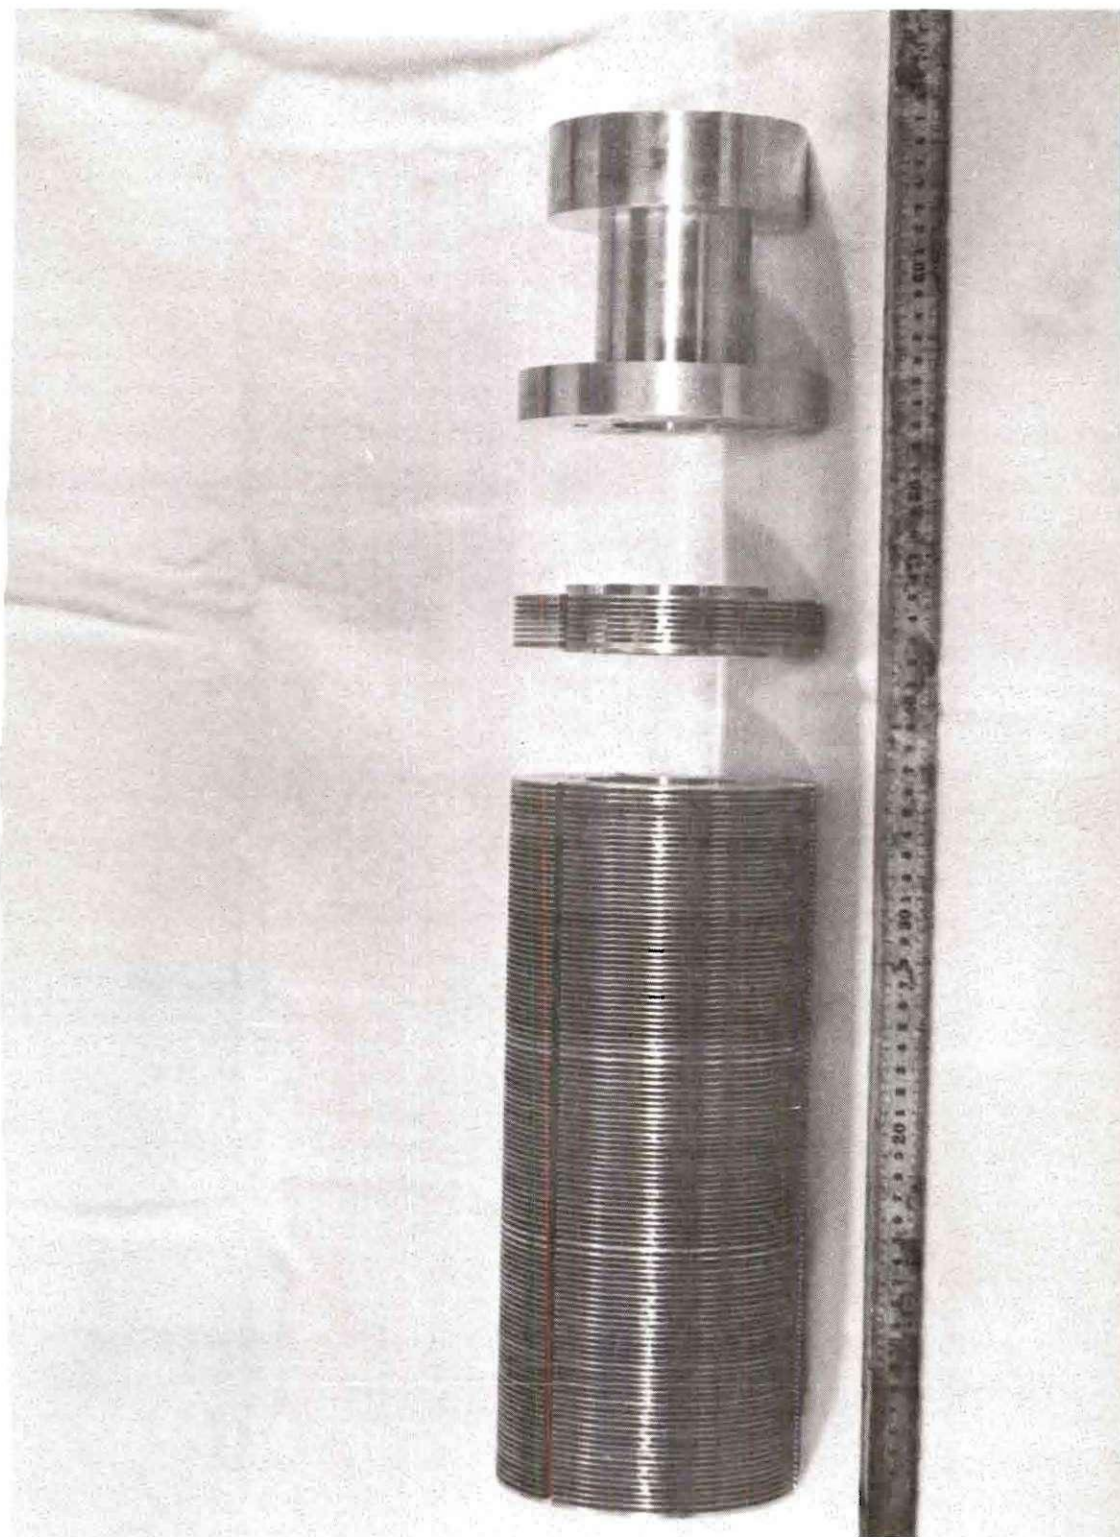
Finned Cylinder and Bearing Supports. Meter Stick for Size.
